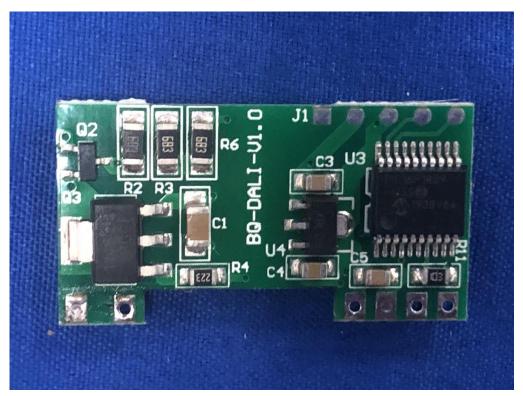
DALI dimming PCB view of model BQ-060DNPC
